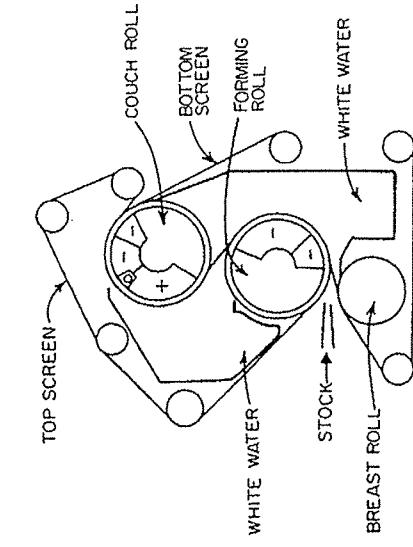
Papriformer machine. [After deMontigny *et al.* (48).]
